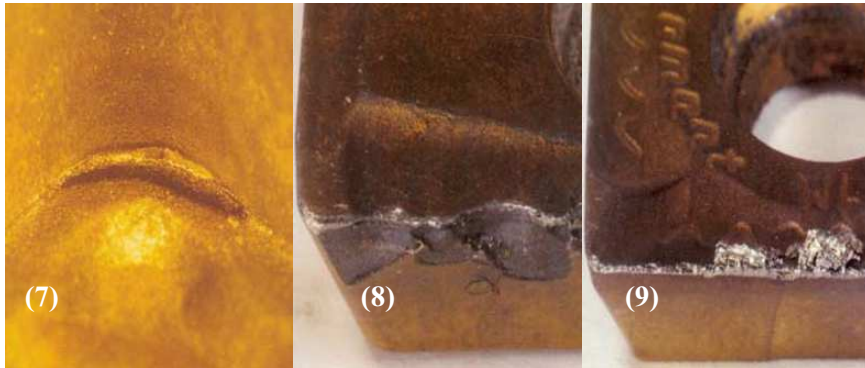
Cutting tool wear types: (7) chipping; (8) fracture; and (9) built-up edge
